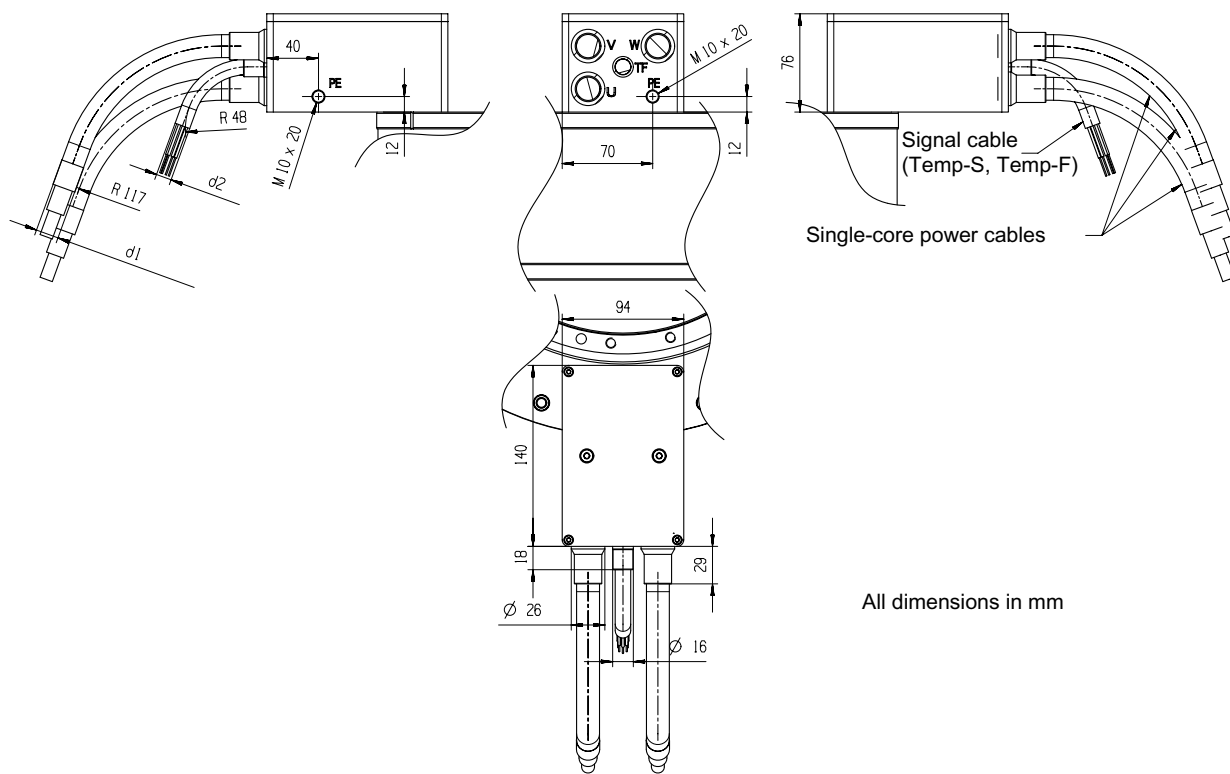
Radial electrical connection towards the outside with sleeve and single core for 1FW6160 and 1FW6190, 50 mm² core cross-section
